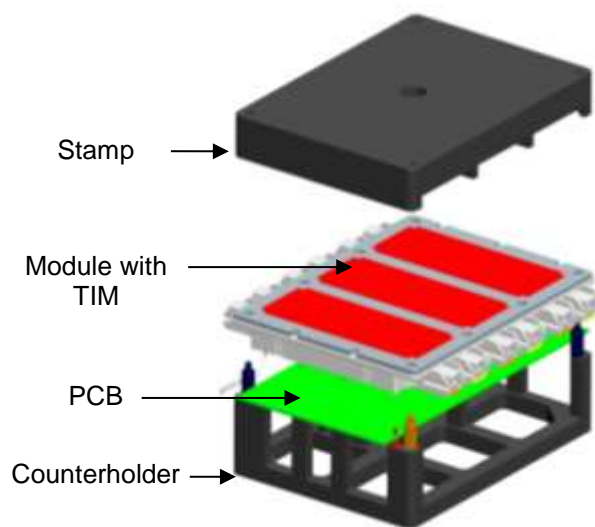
Possible press-in tools for EconoPACK™ + modules, view from top side
